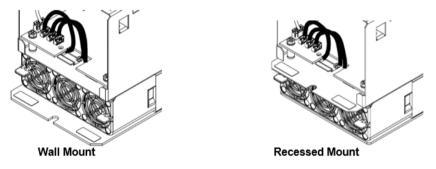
Connecting the fan plug(s) into the Drive PCBA
